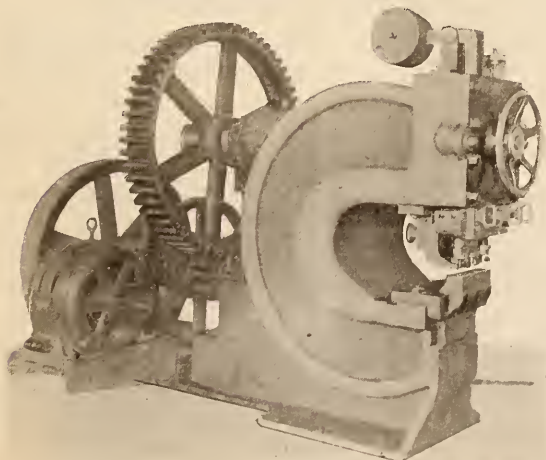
20-INCH THROAT PUNCH, MOTOR DRIVEN, GEO. B. SENNETT CO., YOUNGSTOWN.
